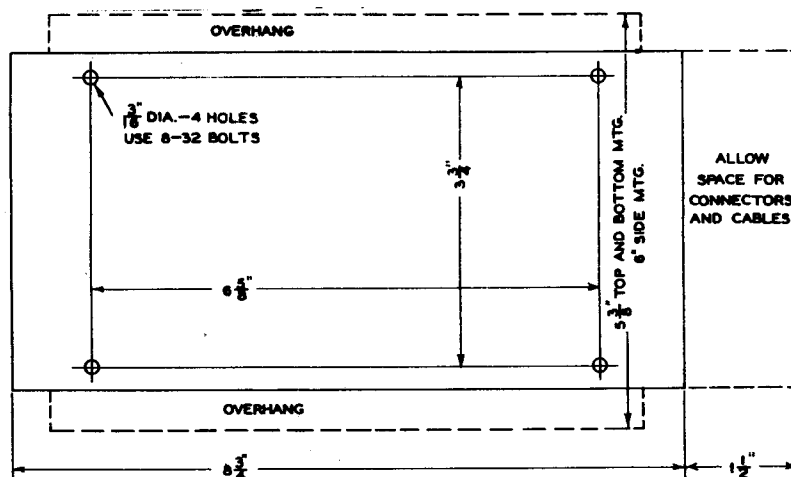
MODULATOR-POWER UNIT—MOUNTING DIMENSIONS
